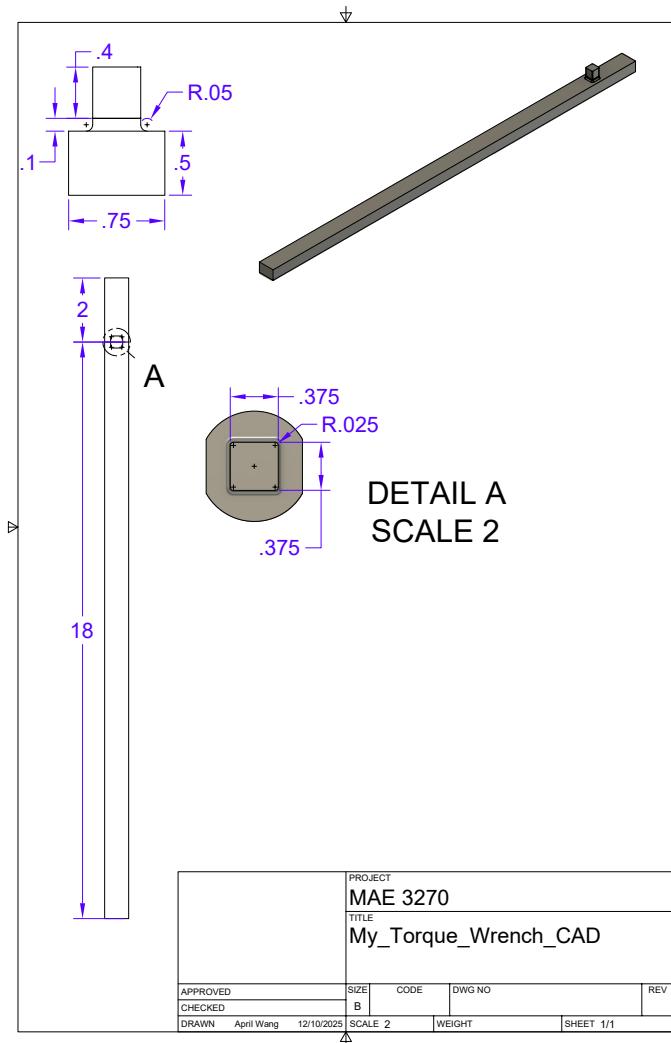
Fusion 360 CAD drawing of torque wrench design with all dimensions labeled.
